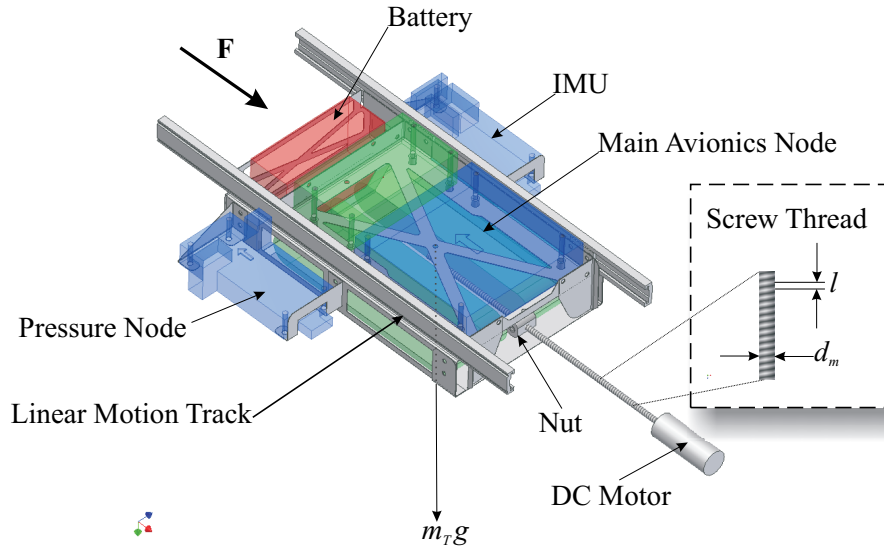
Actuator Tray With DC Motor and Screw Thread
